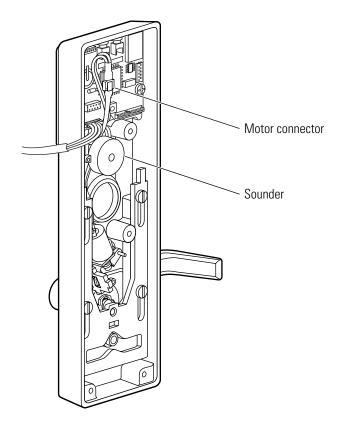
Reinstalling the motor assembly (B.A.S.I.S.escutcheon shown)
